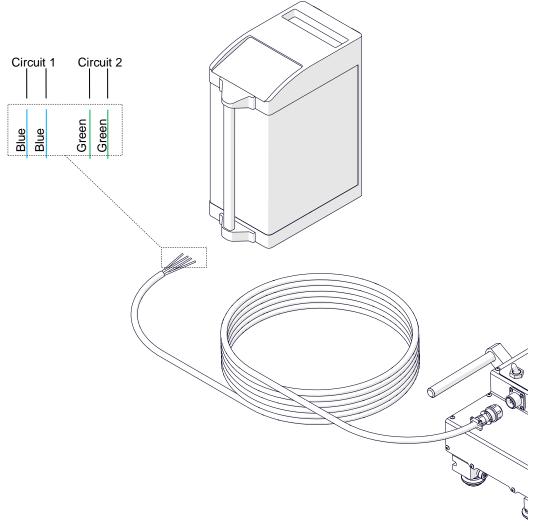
Connecting the arc ignition cable to welding / plasma cutting circuits Make sure that the arc ignition cable is connected correctly. To do this, turn on the power of the carriage, and then set the arc ignition switch to TEST. This should enable the arc for a while.
